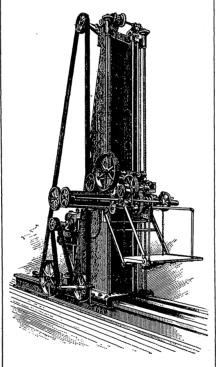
Horizontal Drilling, Tapping and Stud-Inserting Machine.
